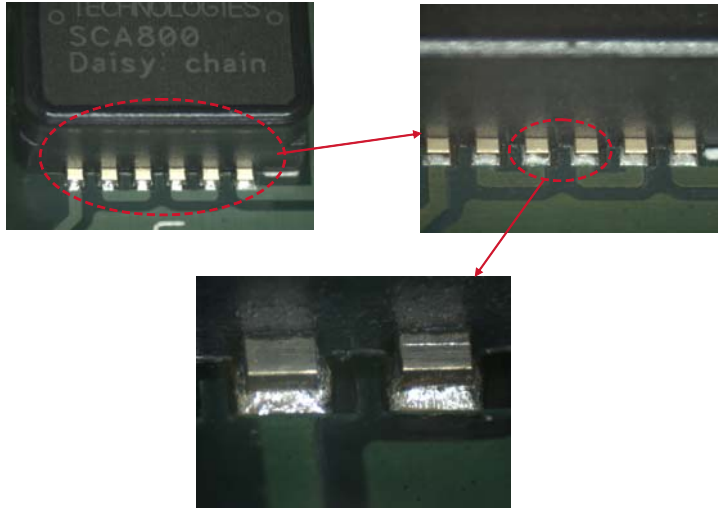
Soldered DFL component on PCB. Solder joints are partly located underneath the DFL component itself.
